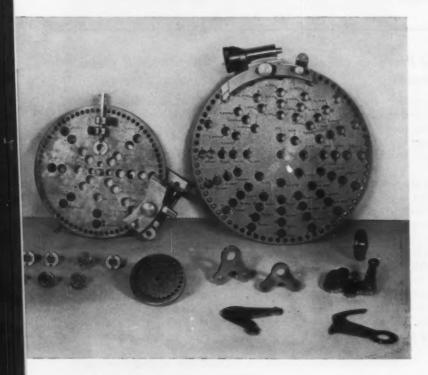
Two universal jig plates that are used to accurately locate holes about a reference hole in a workpiece. A number of eccentric bushings (left) and work-pieces (right) are in the foreground.
